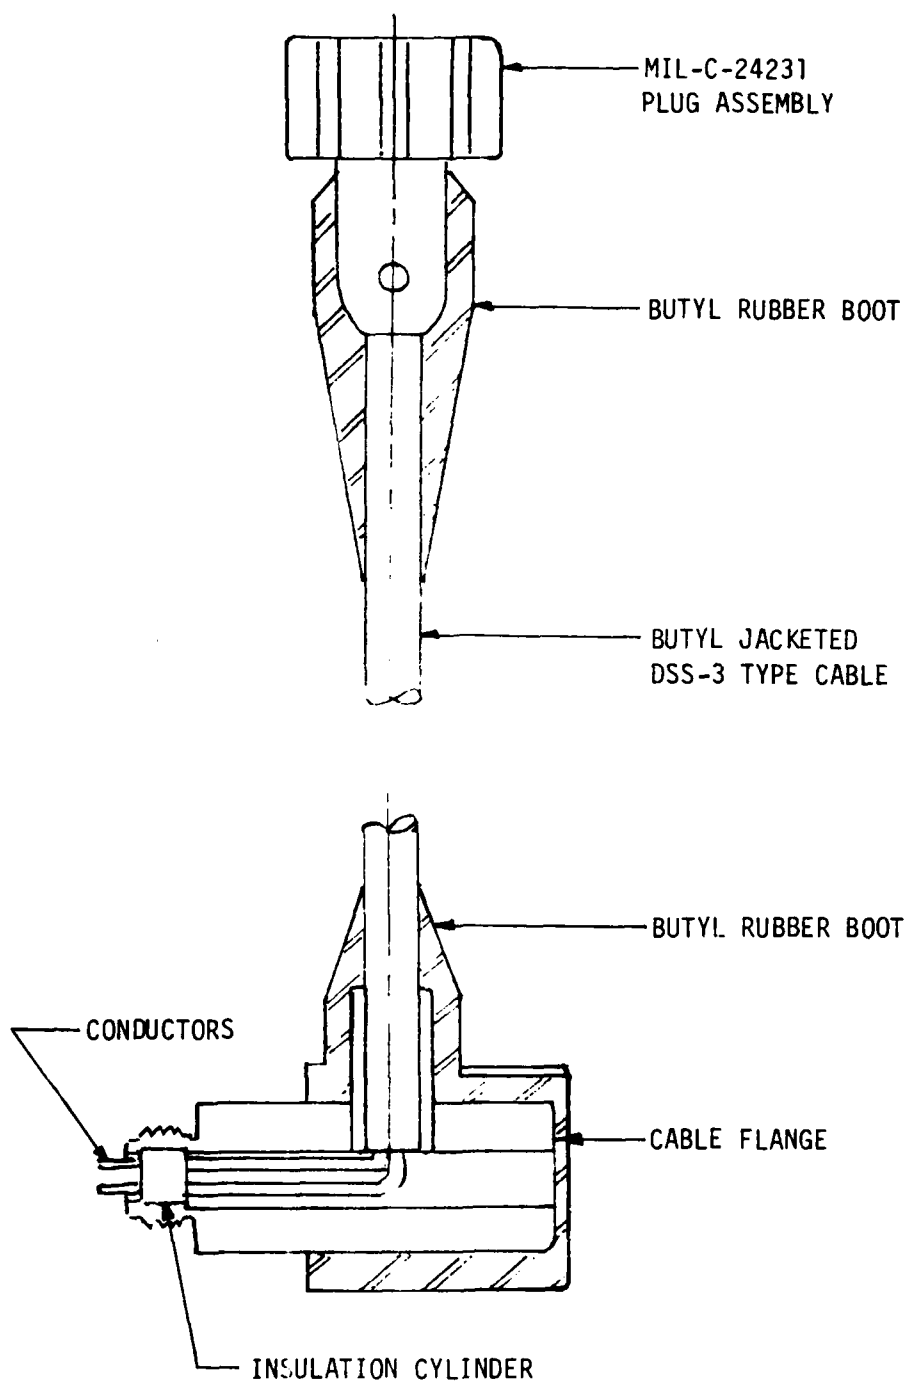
MWSC AN/BQR-21 CABLE HEAD ASSEMBLY
